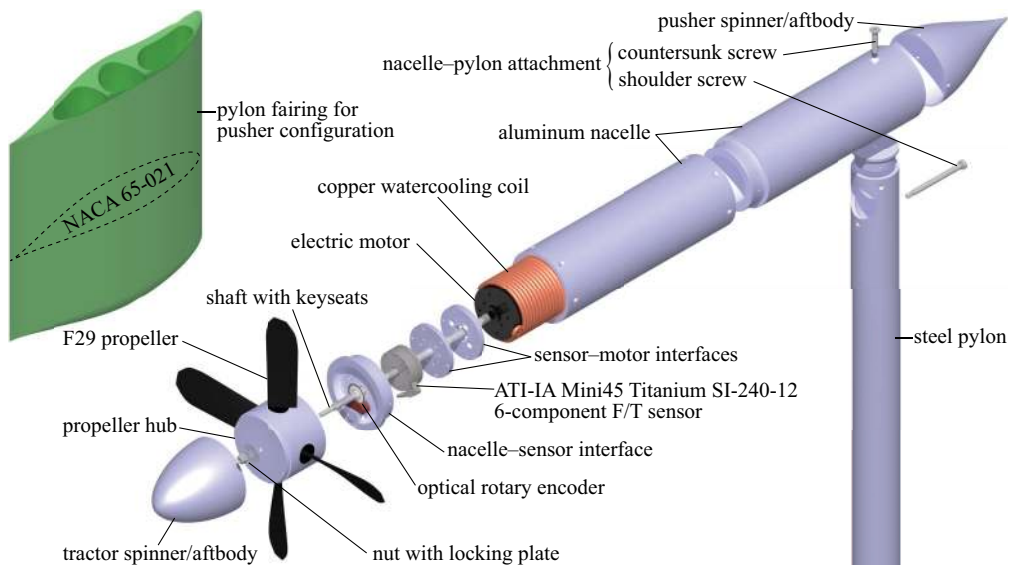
Exploded view of propeller unit A with F/T sensor, indicating the various components.
